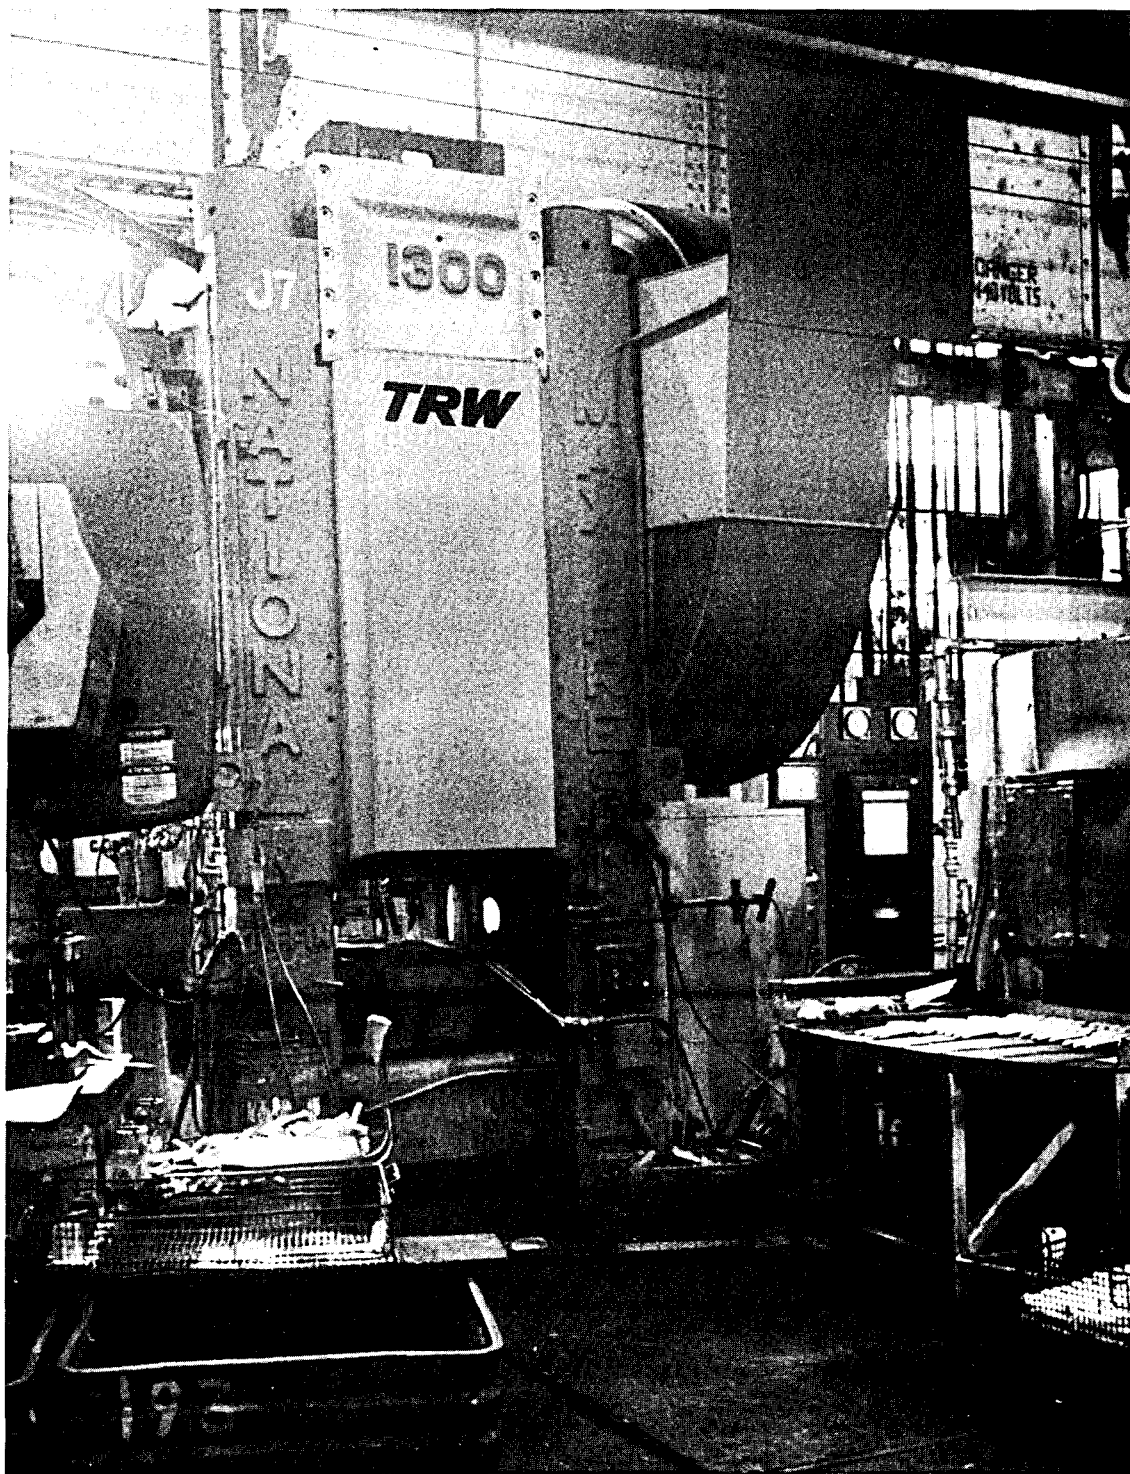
TRW Mechanical Press of the Type Used for Directionally Forging MA-6000.
